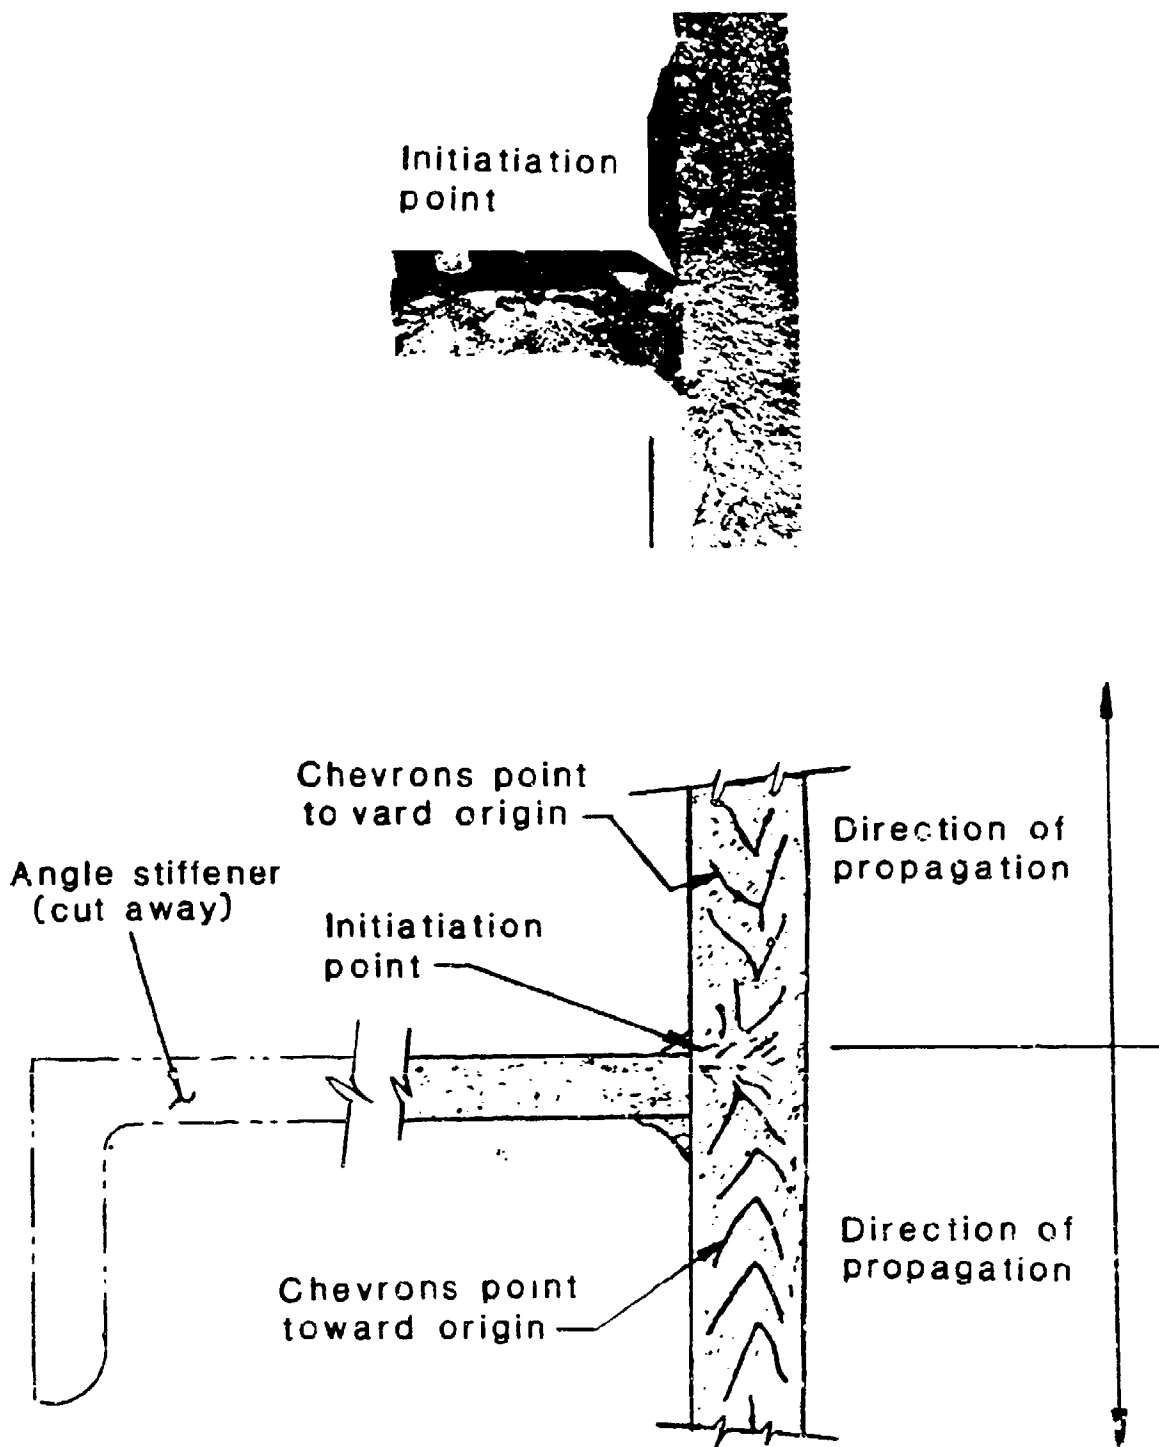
Locating the Origin of a Fracture by Chevron Points.
